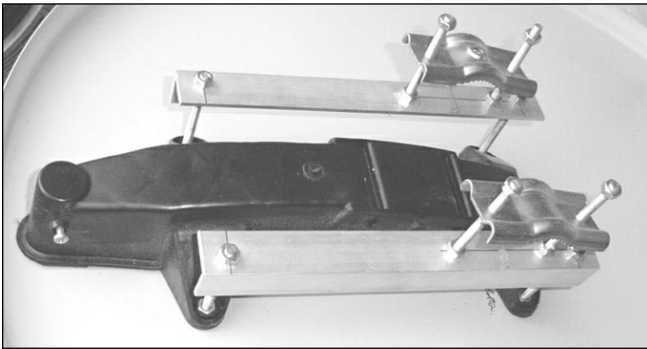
Mounting arrangement for a surplus TVRO dish using angle sections
